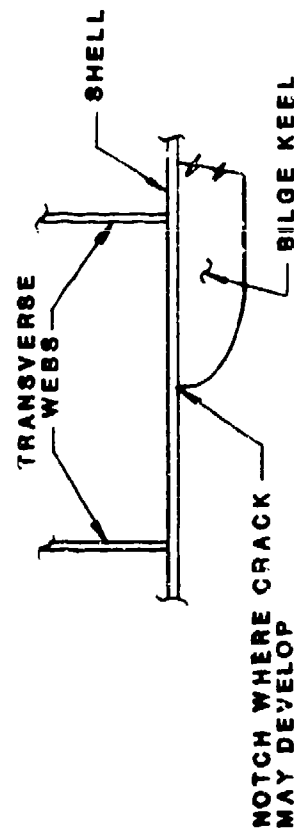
Illustration of the Notch Effect Caused by Fillet Weld
